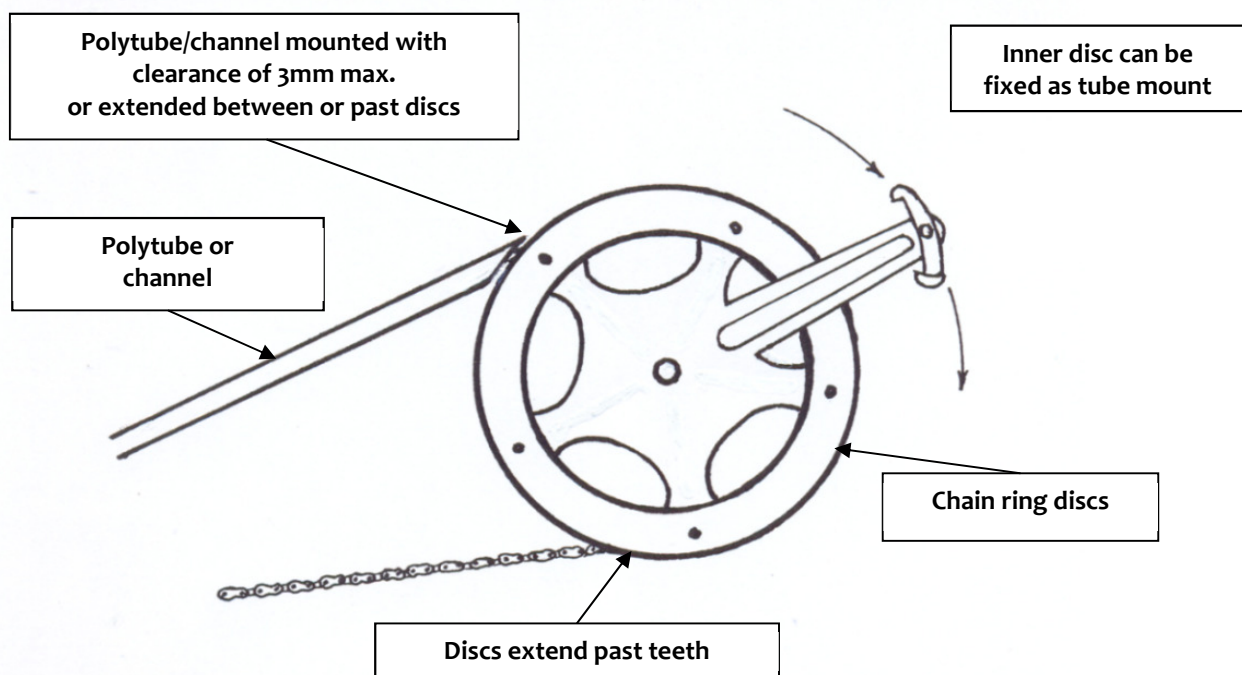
, Guarding of chain drive system as per 4.1.3 & 4.1.4
